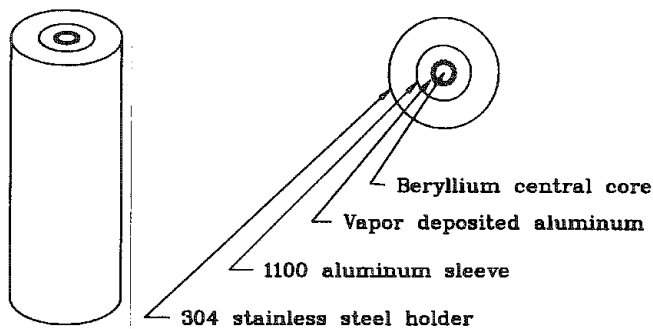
Shock-loading assembly showing configuration used for aluminum-clad beryllium.
